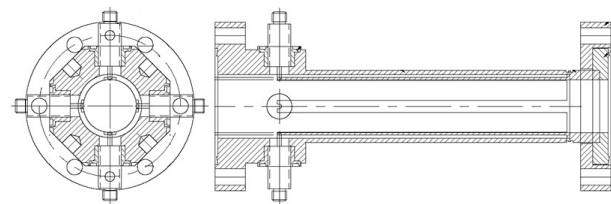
The transverse (left) and the longitudinal (right) cross-sections of the stripline BPM with CF 2.75 inch flanges.
